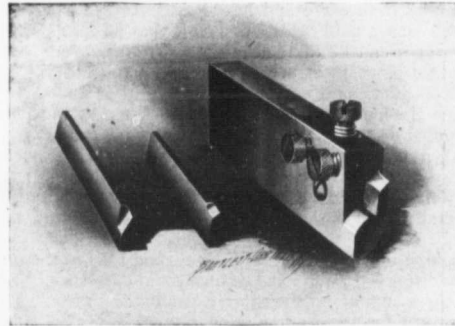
View of Other Side of Tool Shown in Fig. 7.
